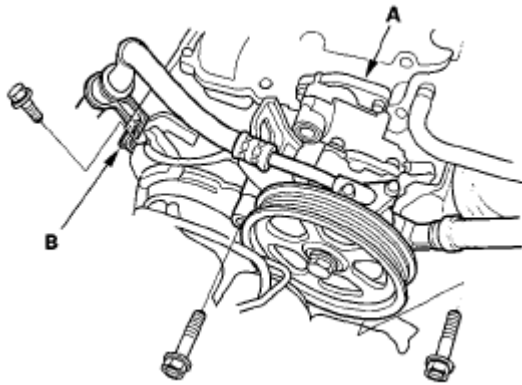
Identifying Power Steering (P/S) Pump, And P/S Hose Bracket
